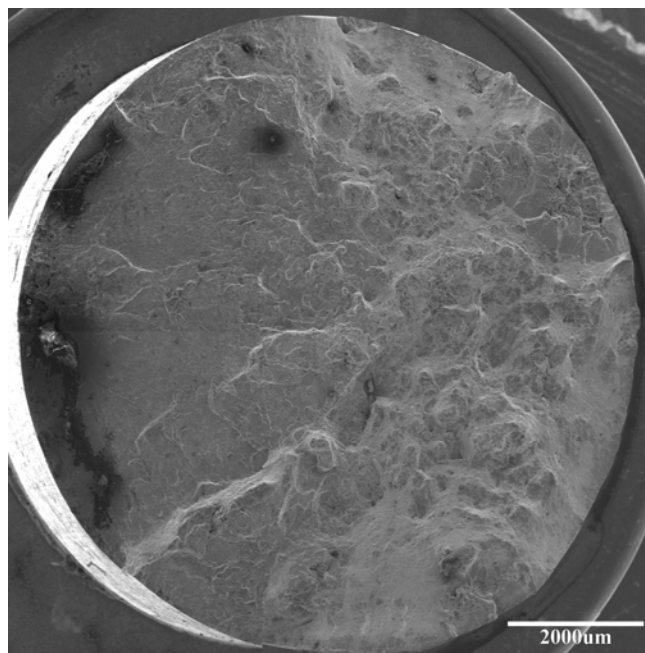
Macroscopic View of a Truncated Cone Specimen Fracture Surface, $S_a = 587$ MPa (Specimen A6)
